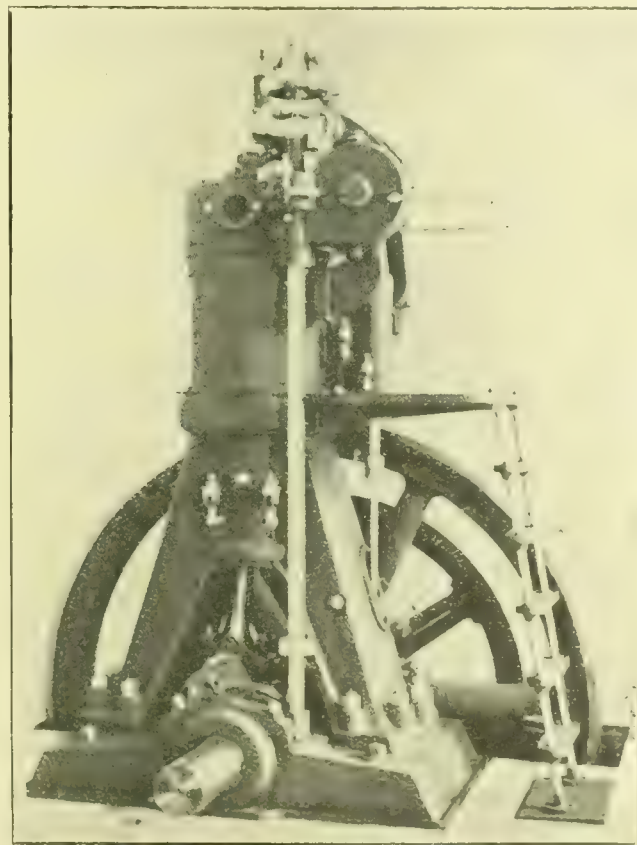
TRUNK PISTON TYPE, 70 TO 60 H.P., 1901: CYLINDER 15.75 IN. DIAM.; 26.62 IN. STROKE; 150 R.P.M.
